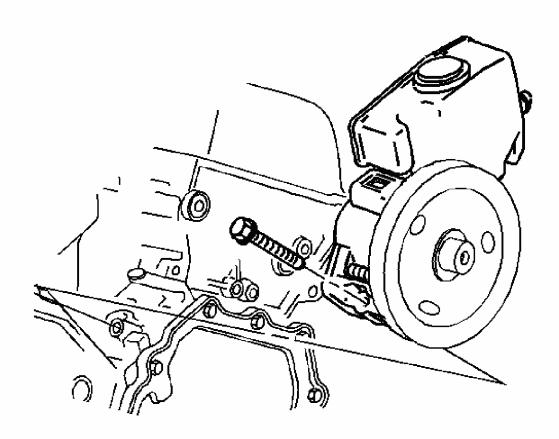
Identifying Power Steering Pump Retaining Bolt Courtesy of GENERAL MOTORS CORP.
